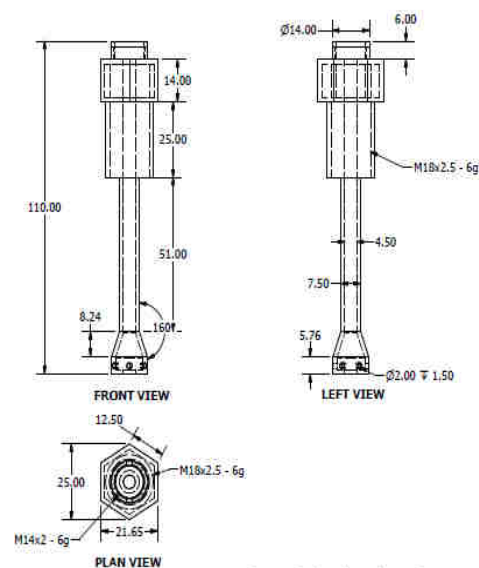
Sectional views of the gas injector of the fabricated twin fluid nozzle (all dimensions are in millimeter)
